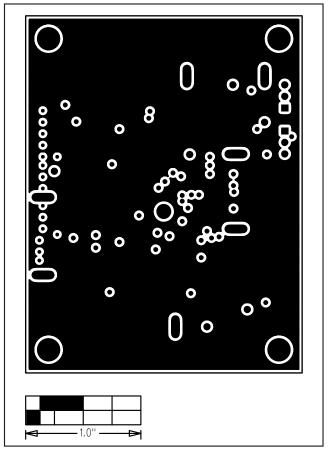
MAX17020 EV Kit PCB Layout—Layer 2 (PGND Plane)
